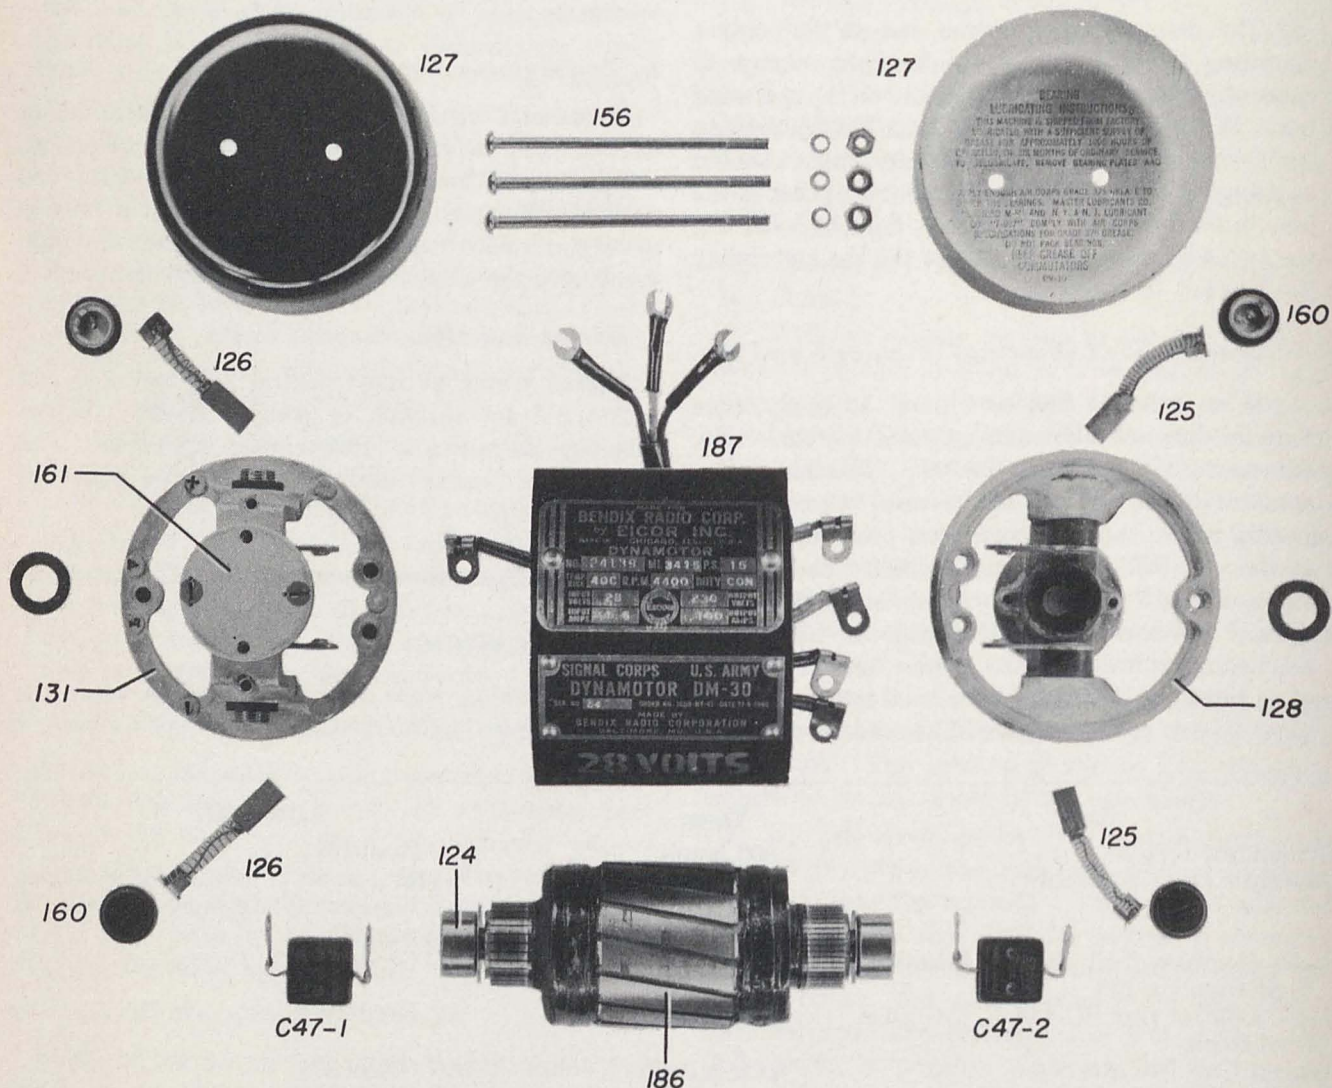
DYNAMOTOR DM-30, DISASSEMBLED
